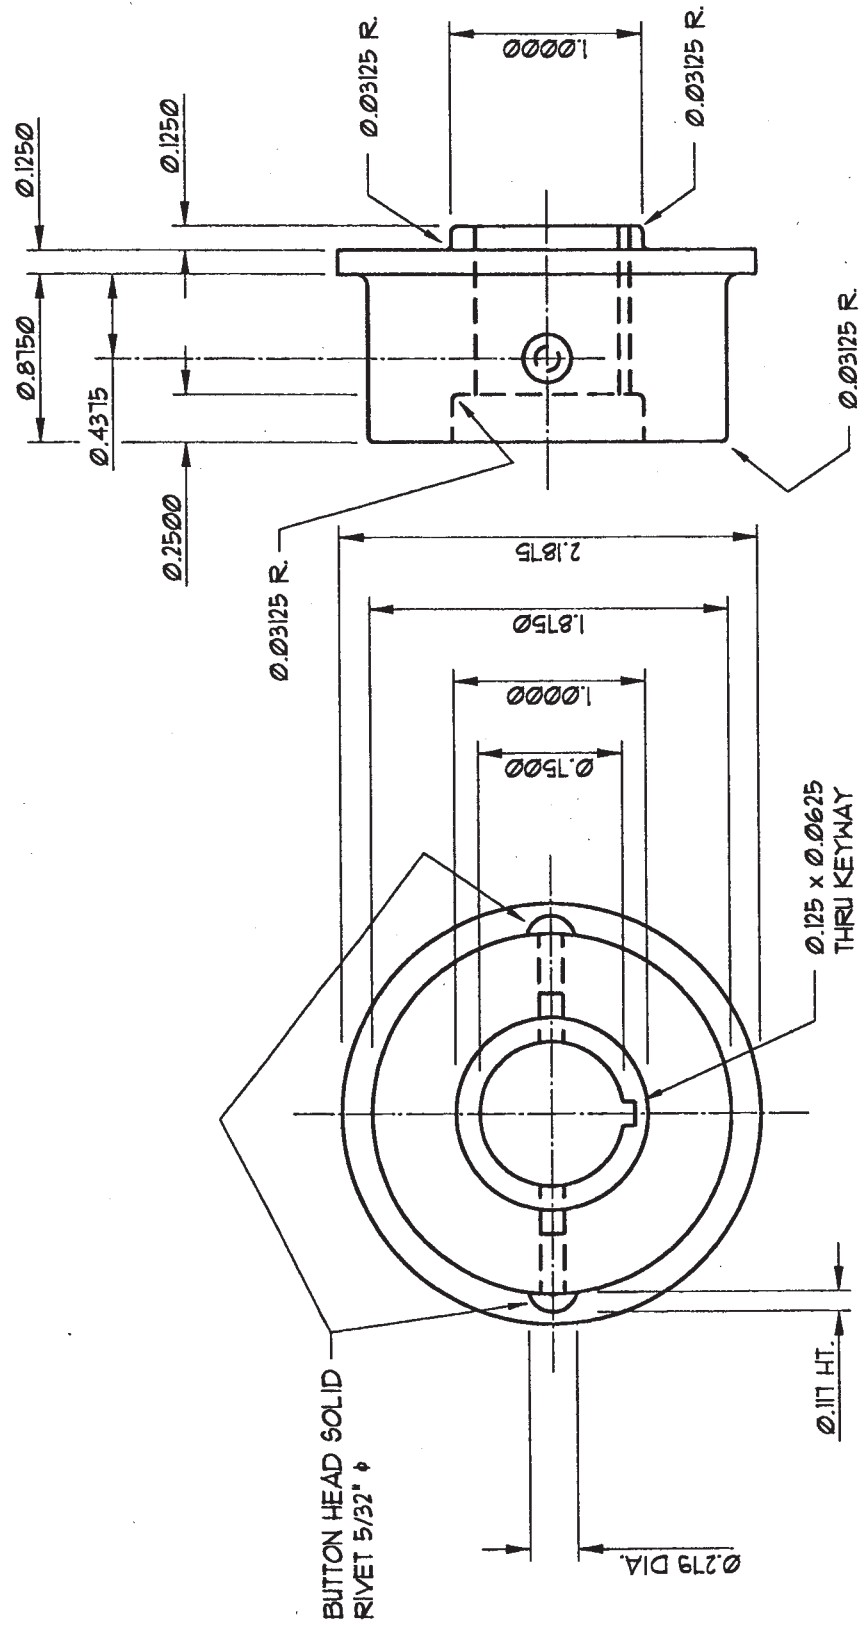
BUTTON PUNCH ROLLER FOR VP SEAMER
